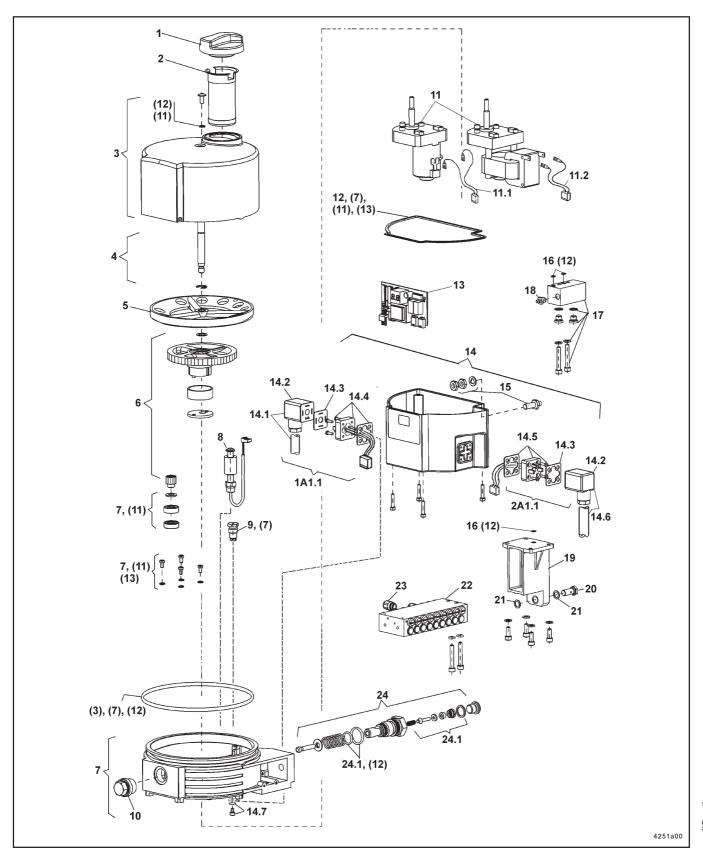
QLS 311 with bottom mounted SSV Divider Block
